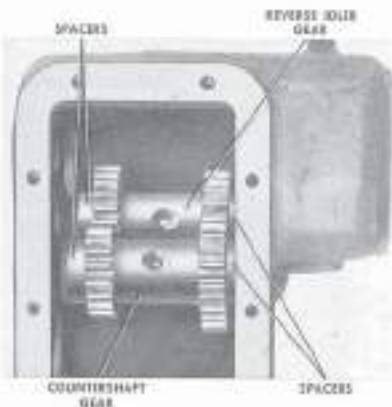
Reverse Idler and Countershaft Gears - Installed View
